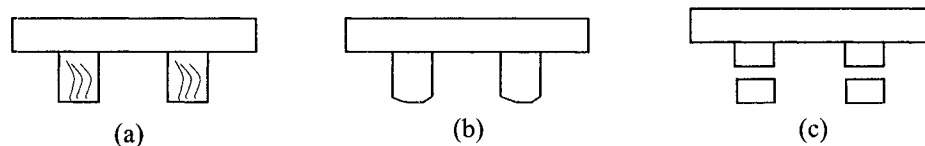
Three kinds of damages of Si mold in ILL method: (a) scratch of surface, (b) collapse of edges and (c) break of mold.
